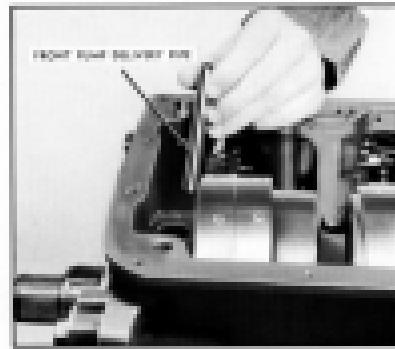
Removing Front Pump Oil Delivery Pipe.
